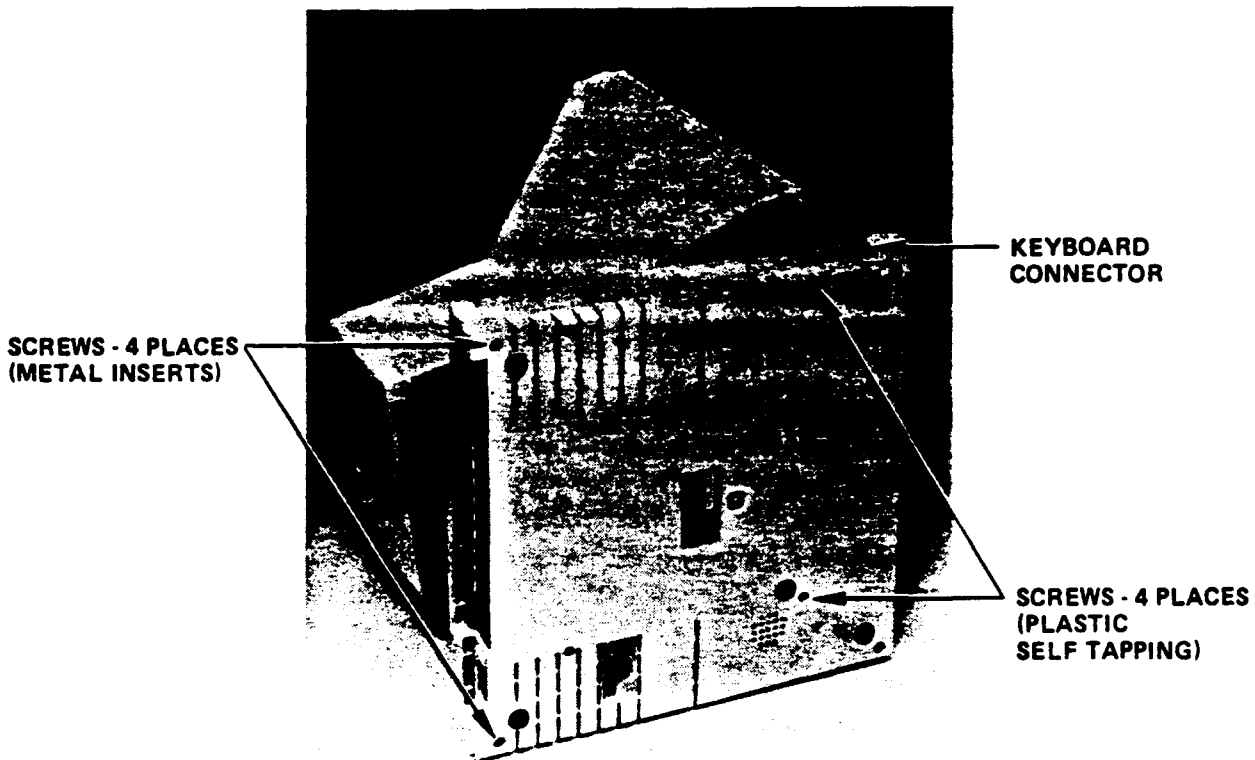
Removal of the Rear Connector Cables and Bottom Cover
